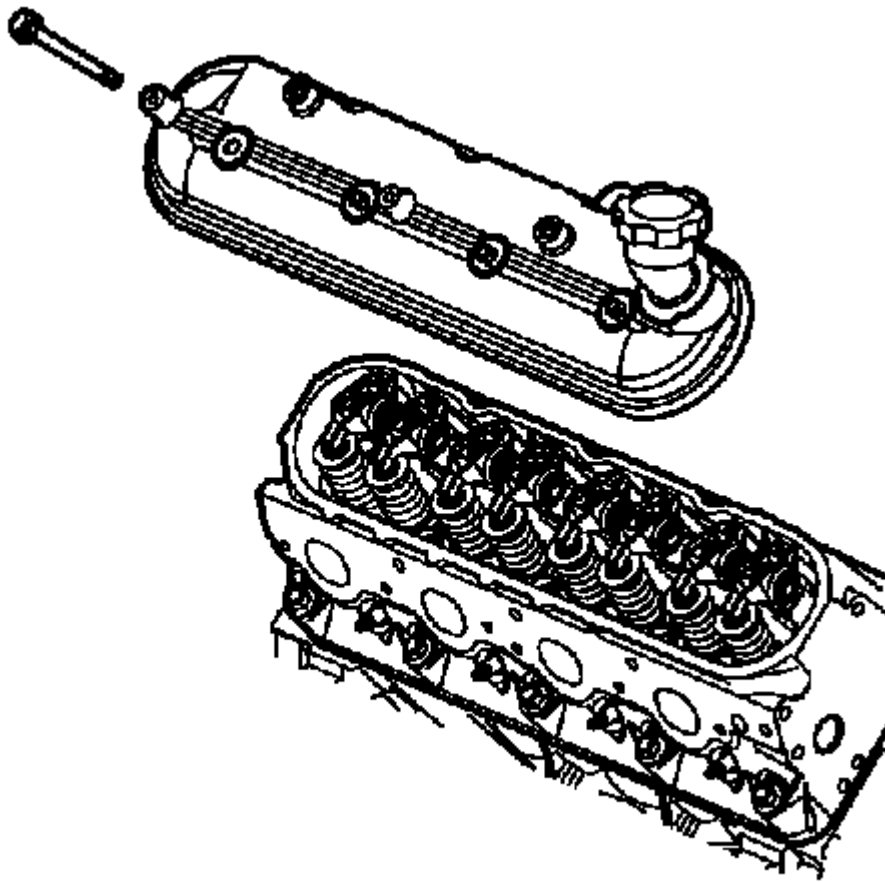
View Of Valve Rocker Arm Cover & Bolts (Right)
